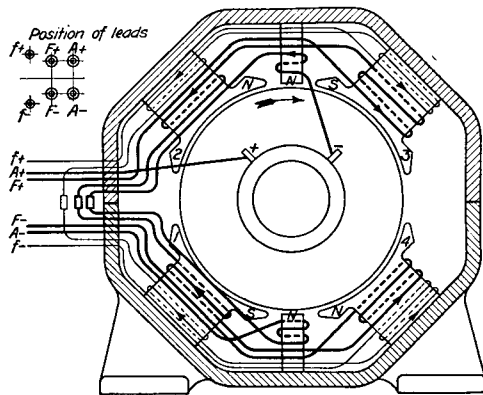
Type MC Motor Frames 20 to 80 Inclusive
